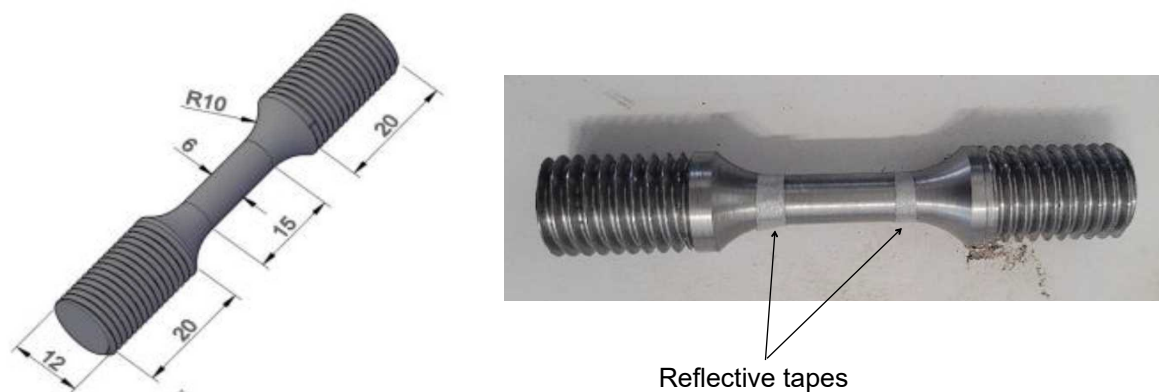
(a) The geometry of the cylindrical dog bone shape specimen (b) An actual specimen showing reflective tapes on the gauge length (all dimensions in mm)
